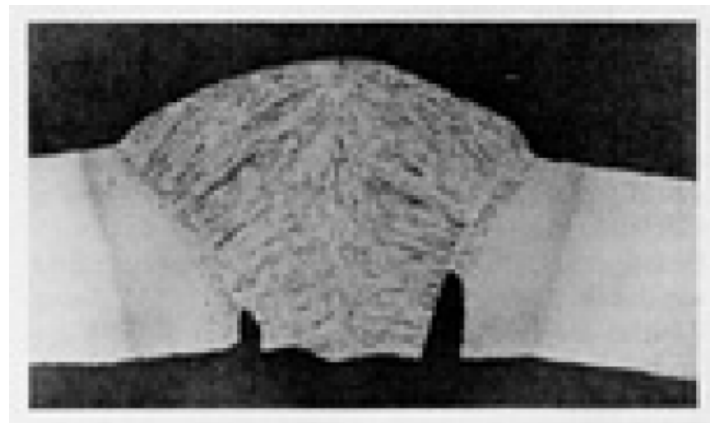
PREFERENTIAL CORROSION IN THE HAZ OF A CARBON STEEL WELDMENT AFTER SERVICE IN AN AQUEOUS ENVIRONMENT.
